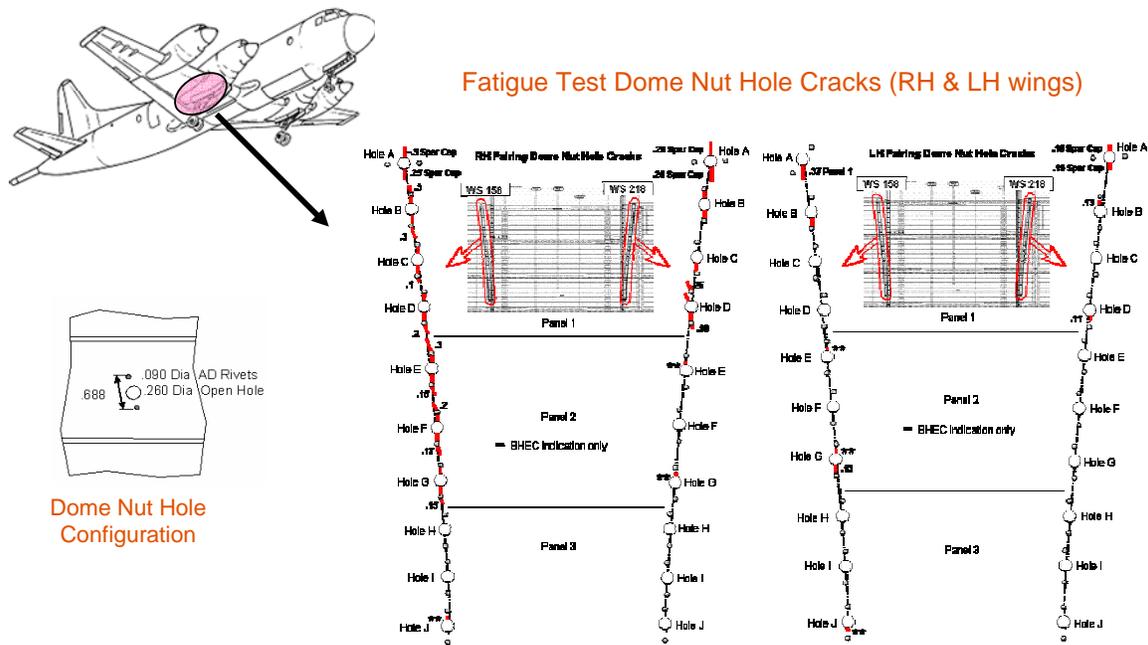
Inboard Nacelle Fairing Dome Nut Hole Cracks in Lower Wing Skin Planks
